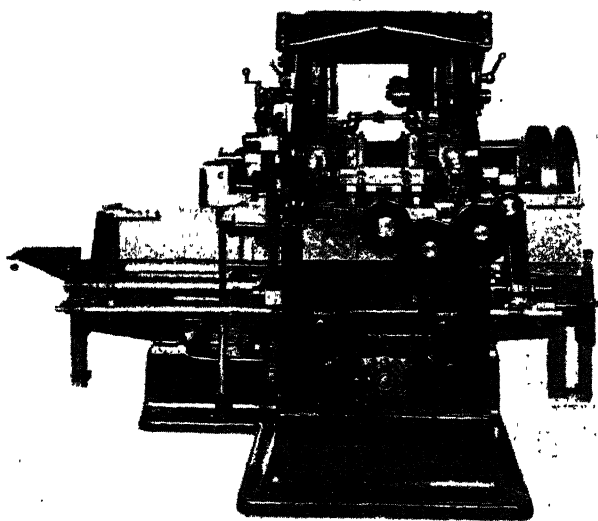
"SMYTH" ROUNDING AND BACKING MACHINE.
